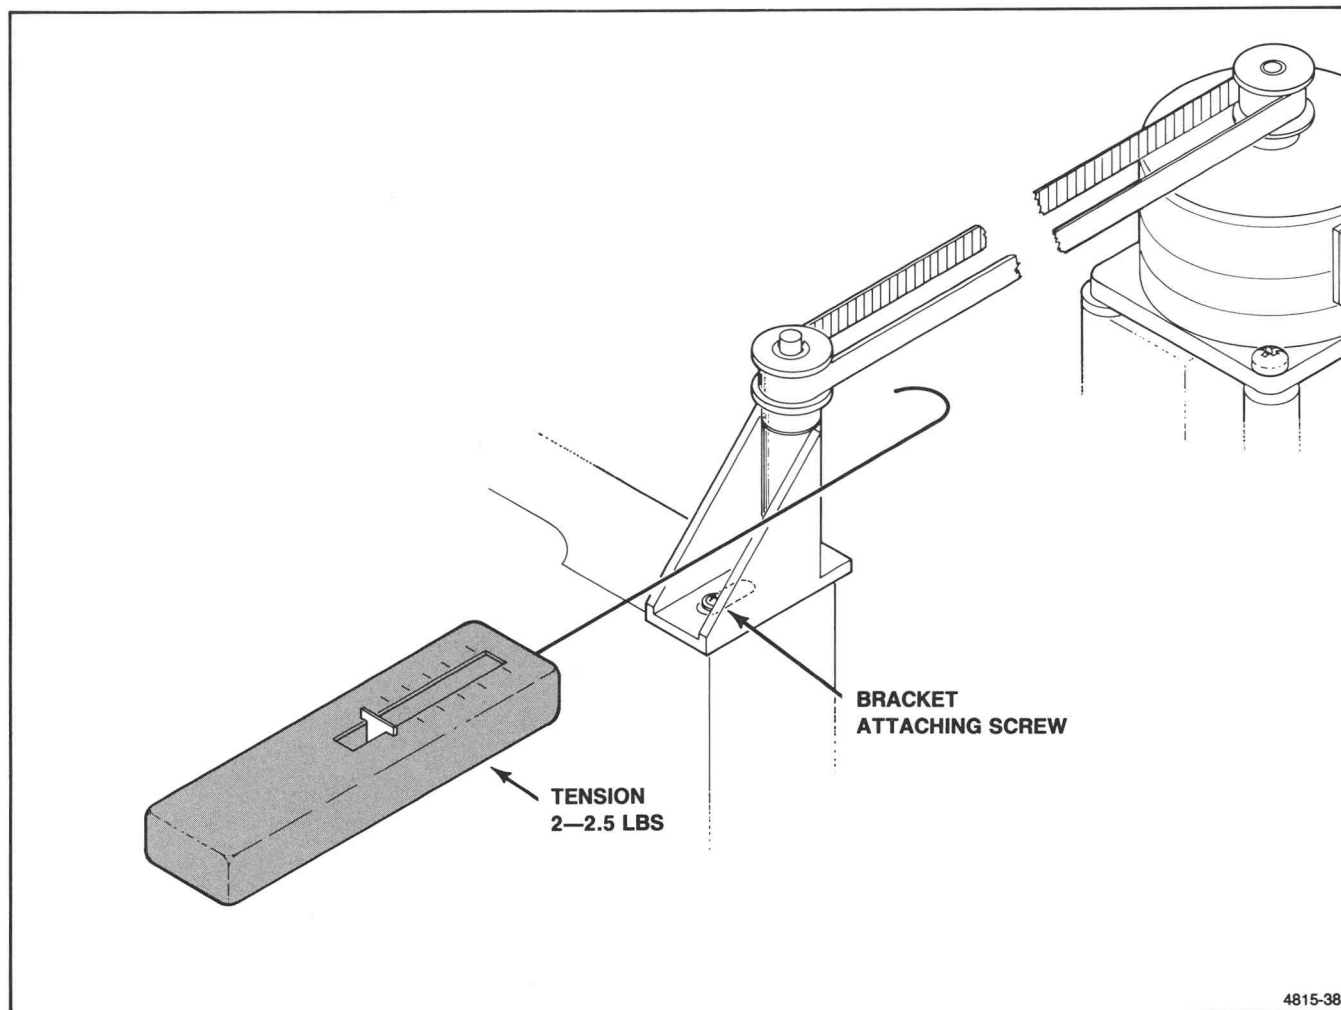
Carriage Drive Belt Tension Adjustment.
